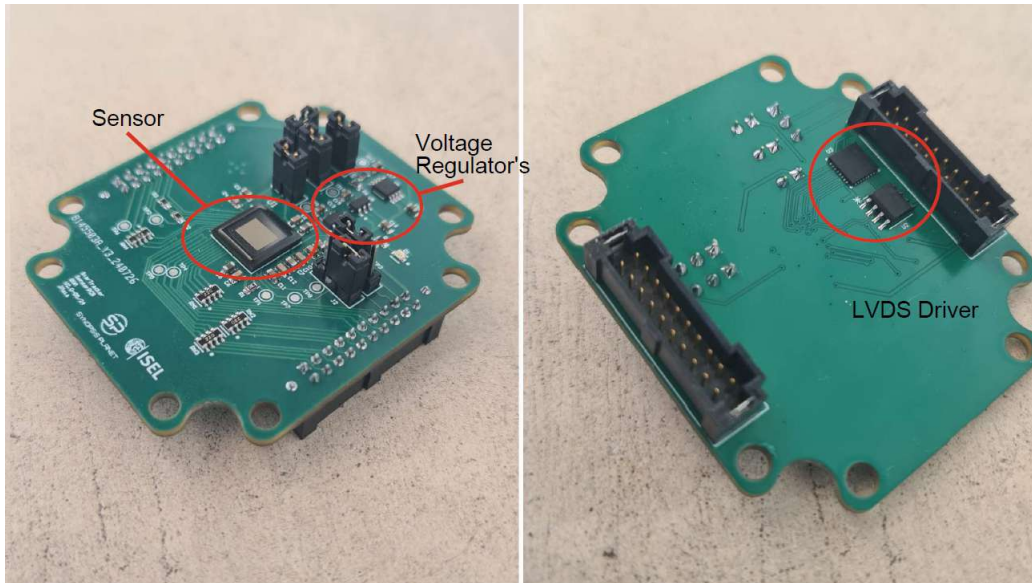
Photograph of the Image Sensor(BGA) Assembled, image sensor and supply regulators o top layer (left) and LVDS drivers on bottom layer (right)
